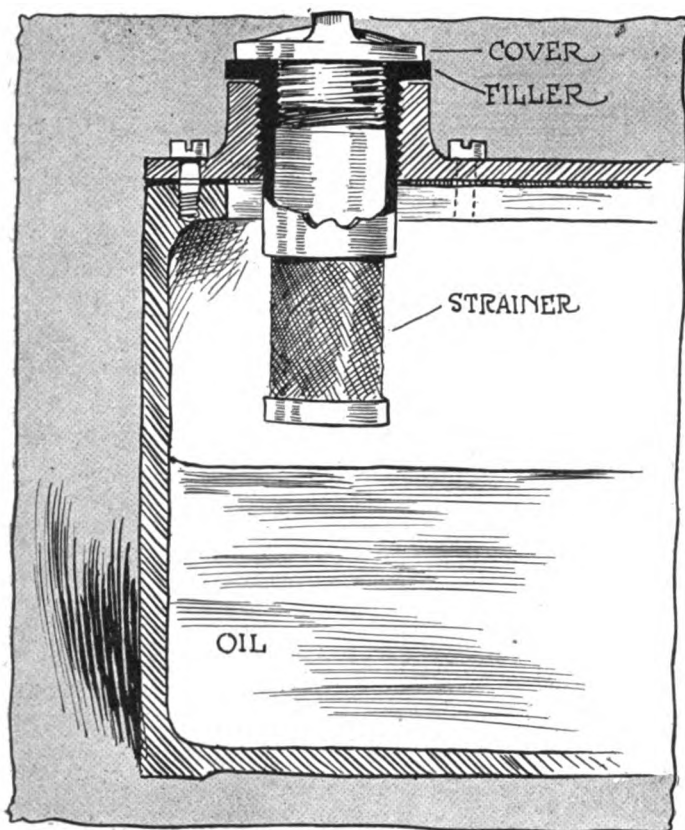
Oil reservoir of Vermont motor, showing filters for the oil
